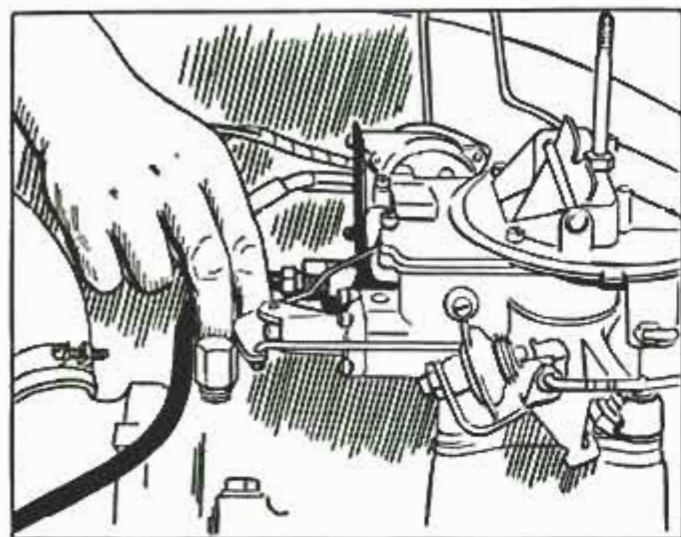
Grasp fuel line at carburetor and shake to see if carburetor sections have loosened. Screws should be tightened to prevent fuel and air leaks
